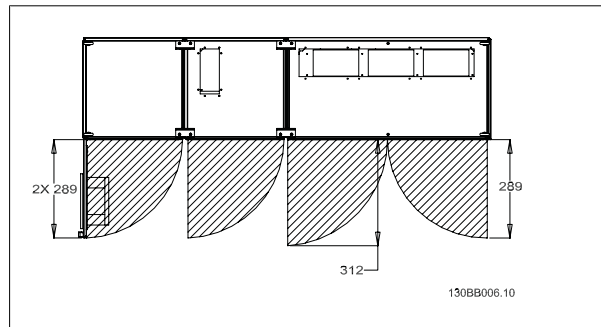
Space in front of IP21/IP54 enclosure type, frame size F4.
